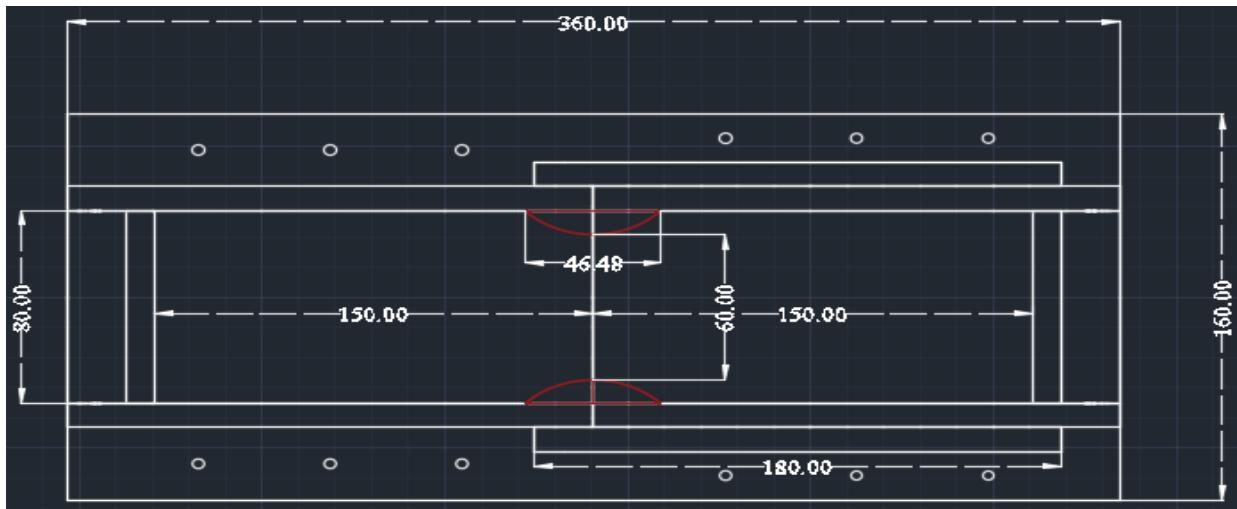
Tensile Mold Dimensions (mm) – Taken from AutoCAD 2016
